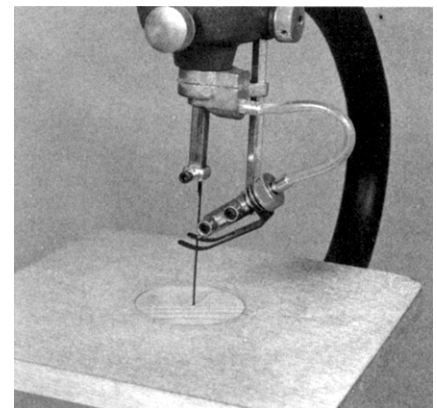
You can also make a special insert. The size of the hole through the insert should be no more than the blade needs to get through.
